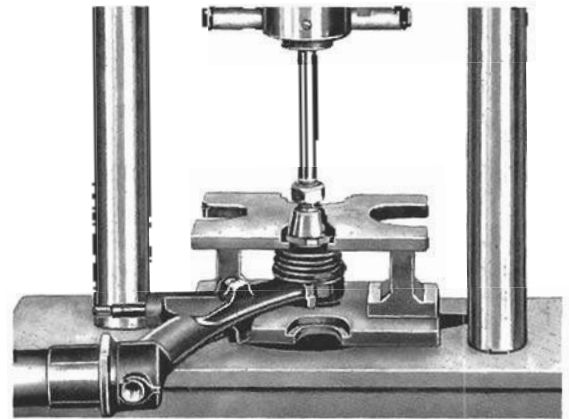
Ball joint being pressed loose from eccentric camber adjusting bushing. Note the nut installed on the ball joint stud. The nut will keep the ball joint from being cut suddenly.
